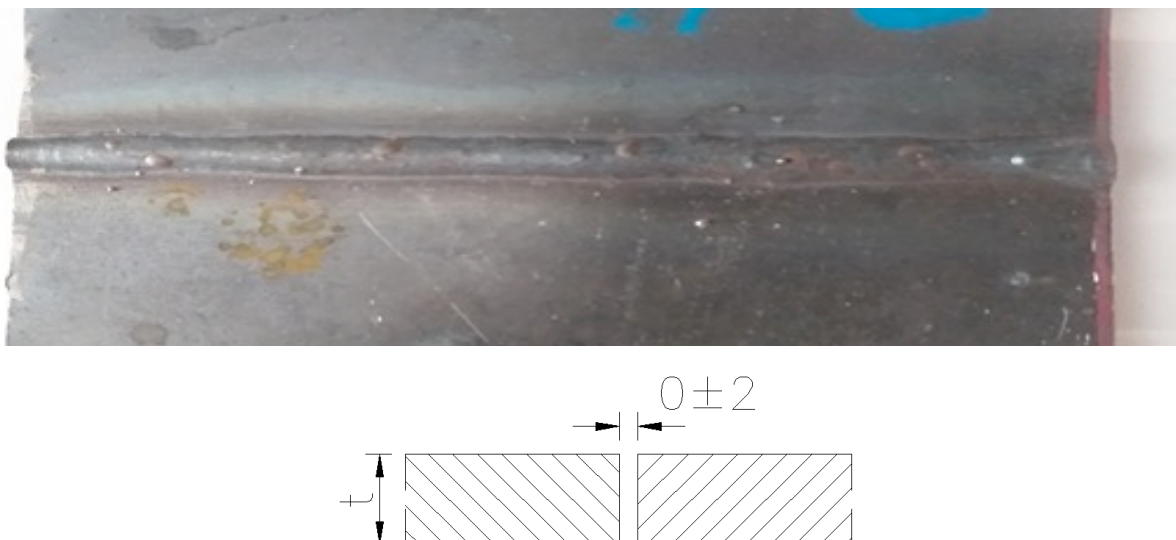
Preparation of samples for MAG welding, thickness $t = 1.8$ mm
